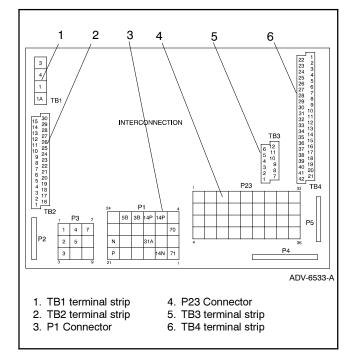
Interconnection Circuit Board Terminal Strips and Connectors
